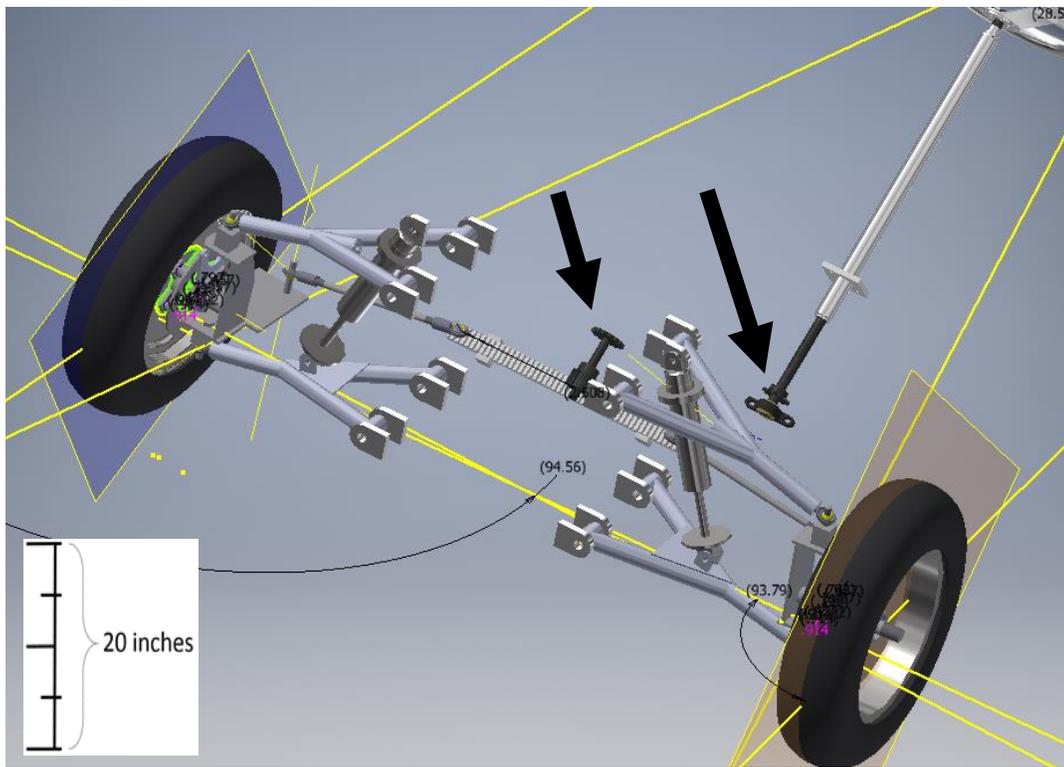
Gears altered to change the gear ratio to obtain the steering degree ratio-The real assembly2.iam
